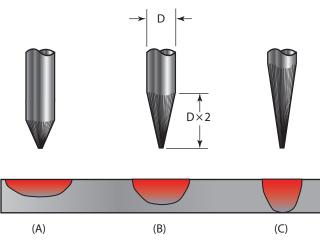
Tungsten tip shape for mild steel or stainless steel.
